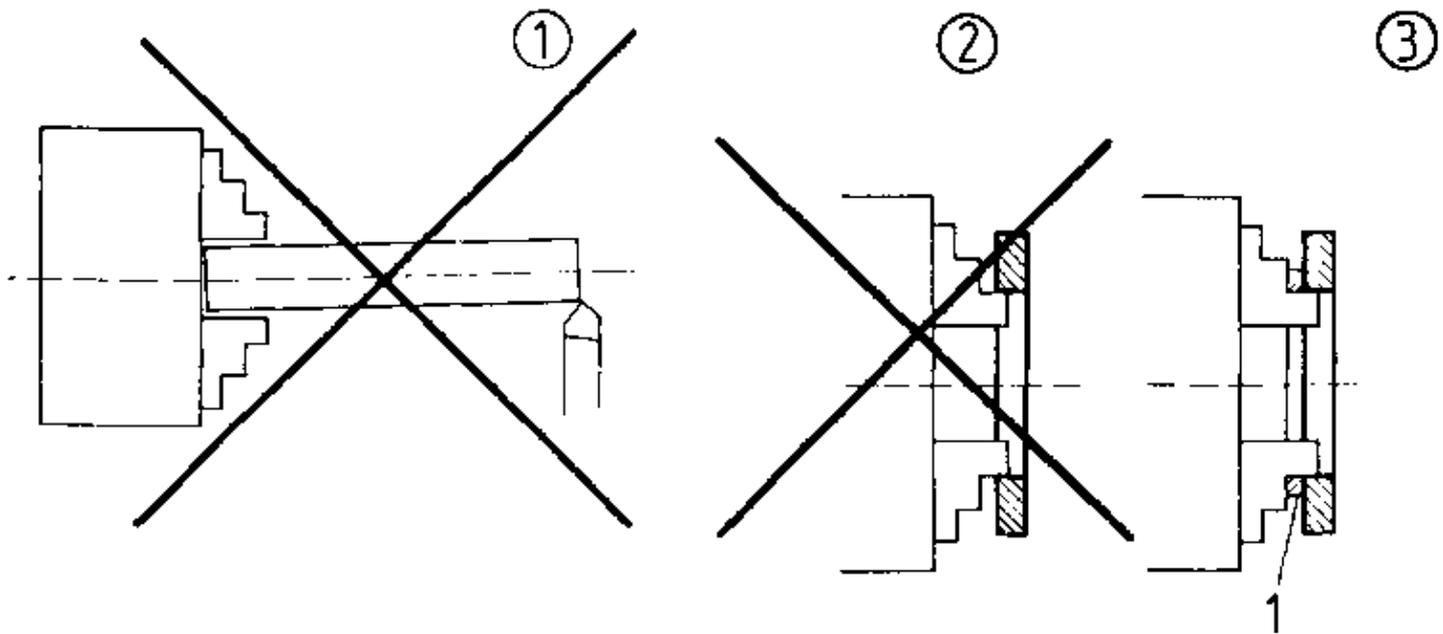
Workpiece projecting too much/ill-fitting clamping jaws
